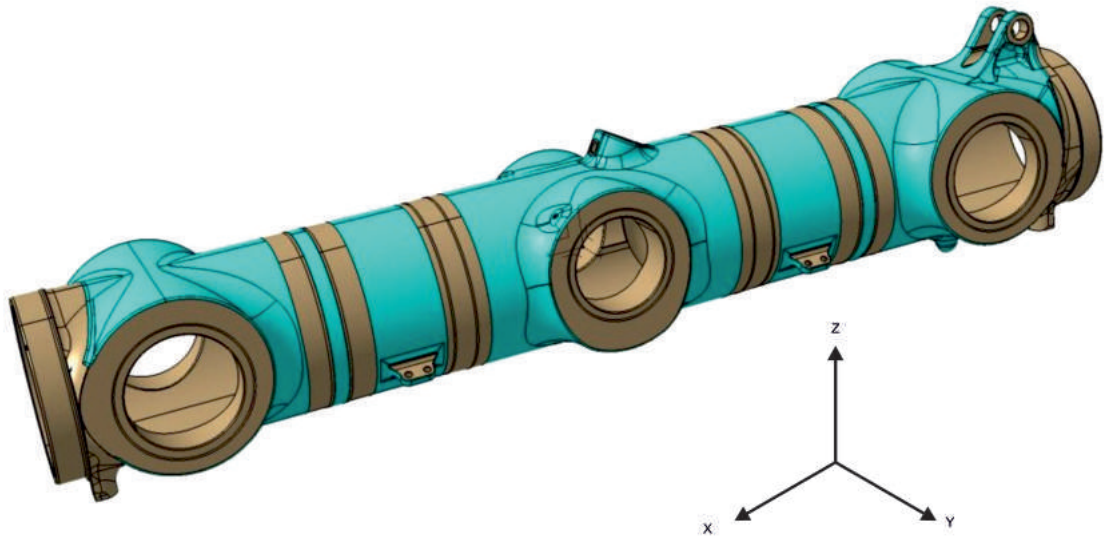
Schematic representation of surfaces covered of a B787 truck beam in finish milling by the 20 mm ball nose milling tool.
